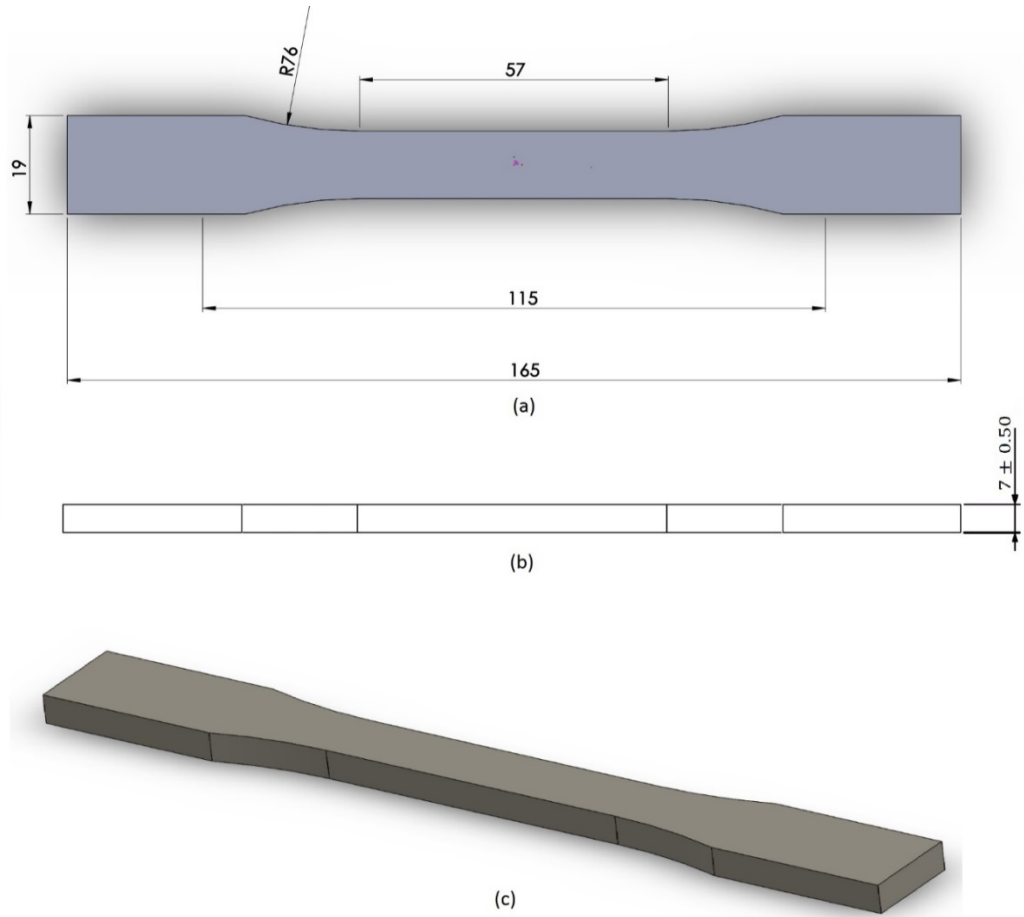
Tensile test sample (a) Top view (b) Side view (c) 3D view
